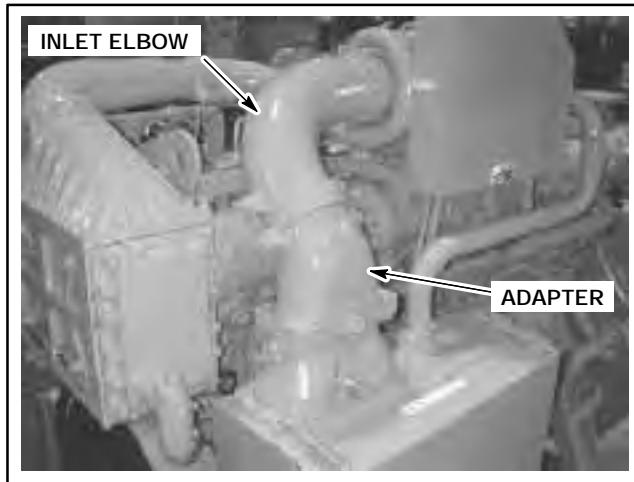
F18/H24 GLD IMPCO 600D Carburetor
